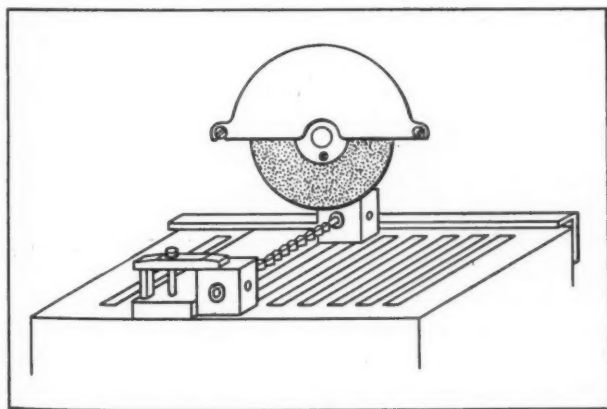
Indexing Block Set-up Used on Surface Grinder for Sharpening Square Broach
